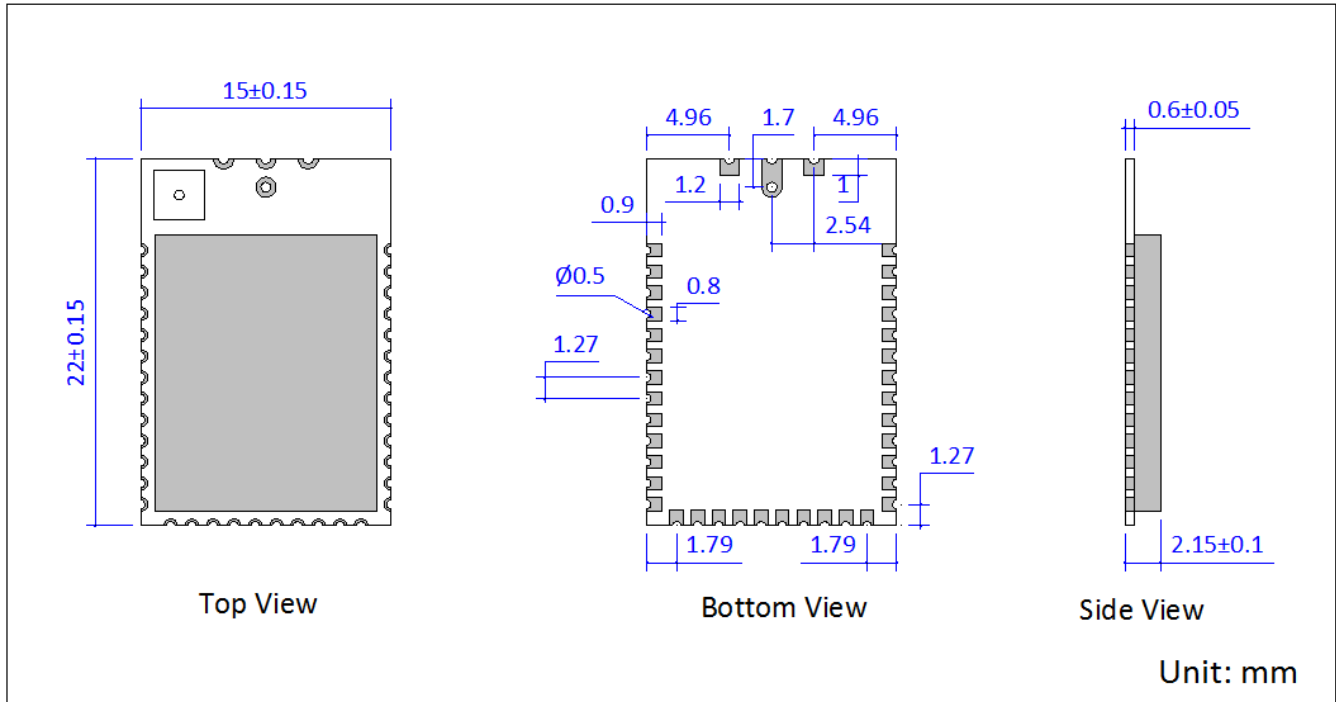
Overall Dimensions of BDE-RFM216-IN
